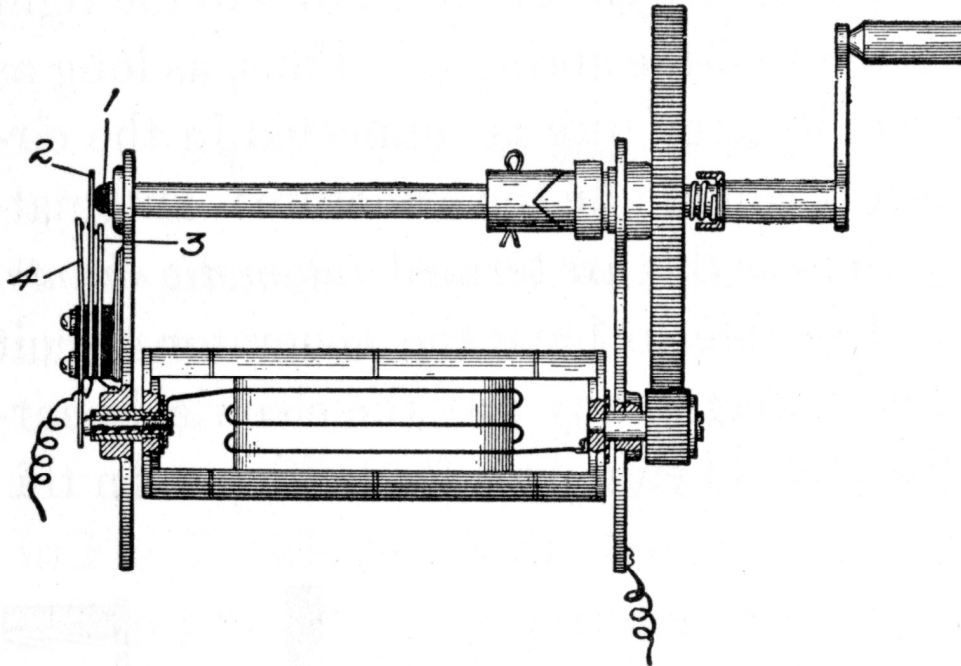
Diagram of a shunt switch and its activation mechanism, shown with the cylindrical armature and its gearing. *Drawing reproduced from McMeen & Miller (1912).
